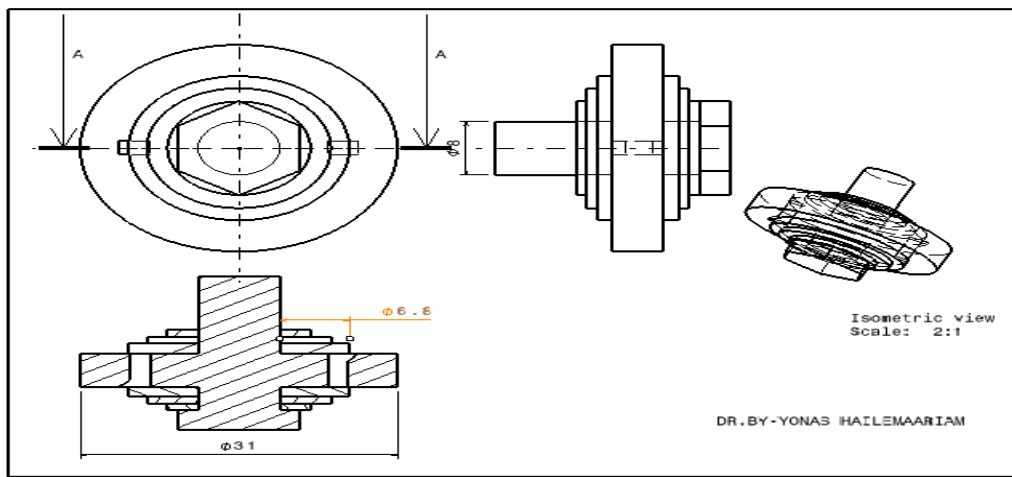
23: 2D-Drawing of valve assembly part of shock absorber
